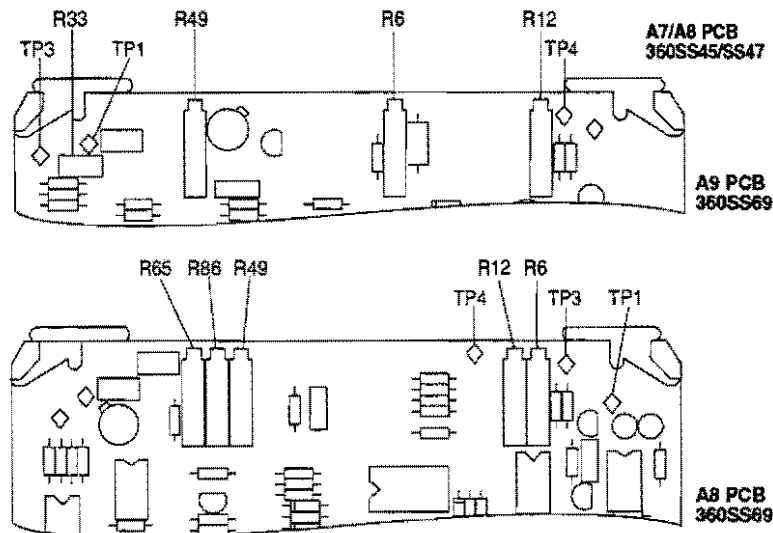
A7 PCB thru A9 PCB Component Locations
